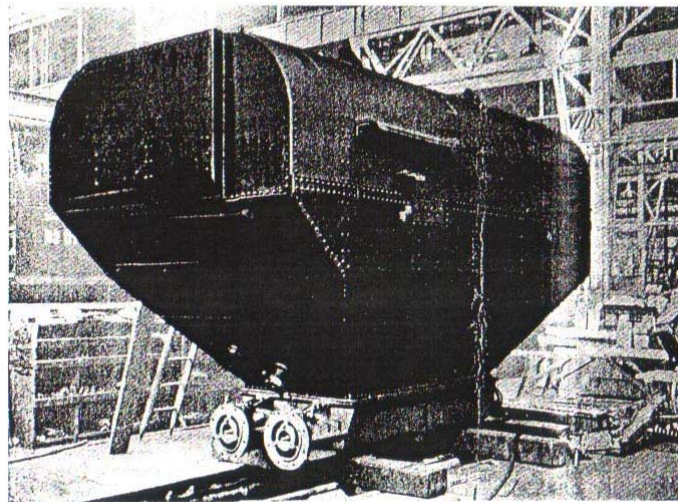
Stug tender for dust fired locomotive. View shows fuel bunker with conveyor screws at bottom.
